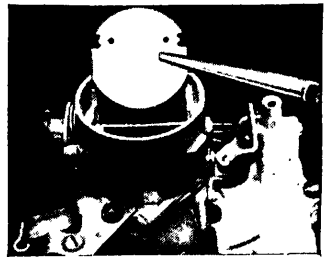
Install choke valve. Center valve in air horn before tightening screws. Use new screws. Lubricate pump arm and countershaft with graphite grease inserted through dust cover attaching screw hole in bowl cover. Use several drops of oil on felt packing on later type units to lubricate countershaft. Do not lubricate other carburetor linkage as this increased accumulation of grit will accelerate wear
